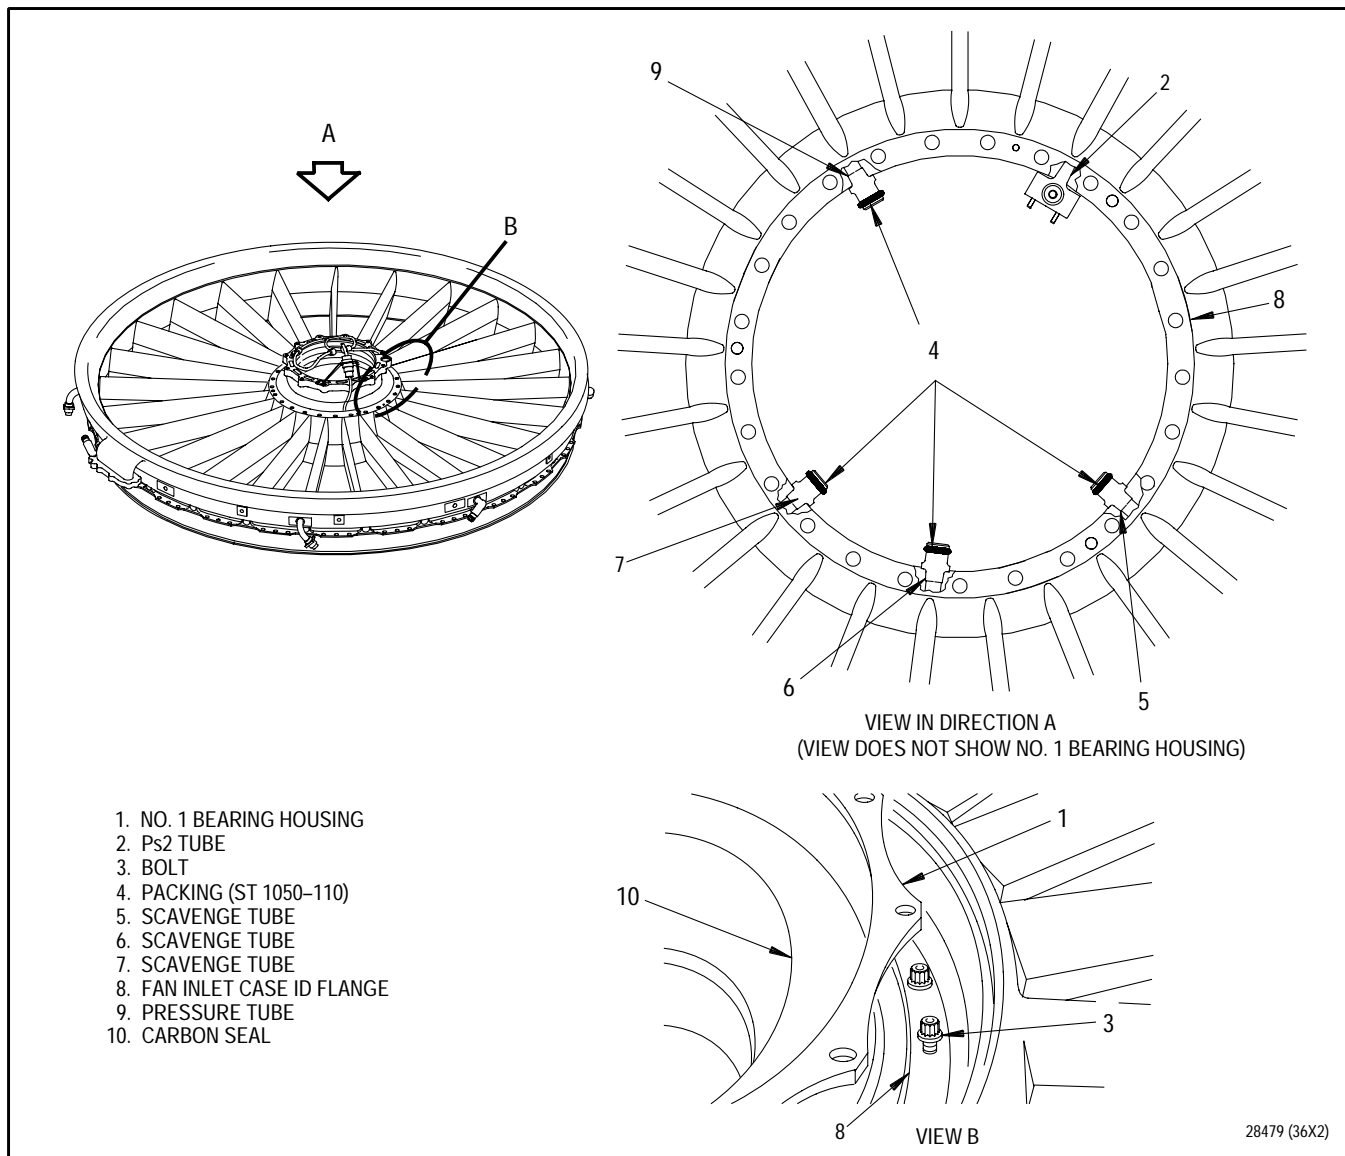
A. No. 1 Bearing Housing - Installation (Before T.O. 2J-F100229(I)-503)
